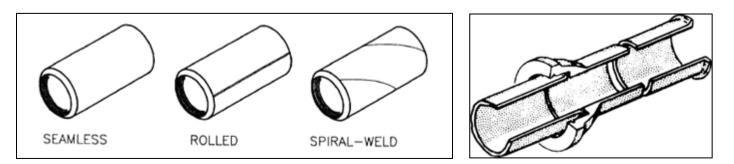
Three types of steel tube and pipe and cut-away view of a cast iron pipe (from Pipe Drafting & Design, Parishan & Rhea)
